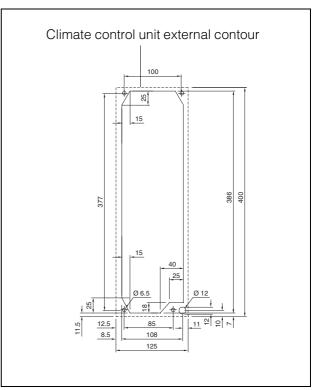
Mounting cut-out and hole sizes for internal mounting (full internal mounting)
